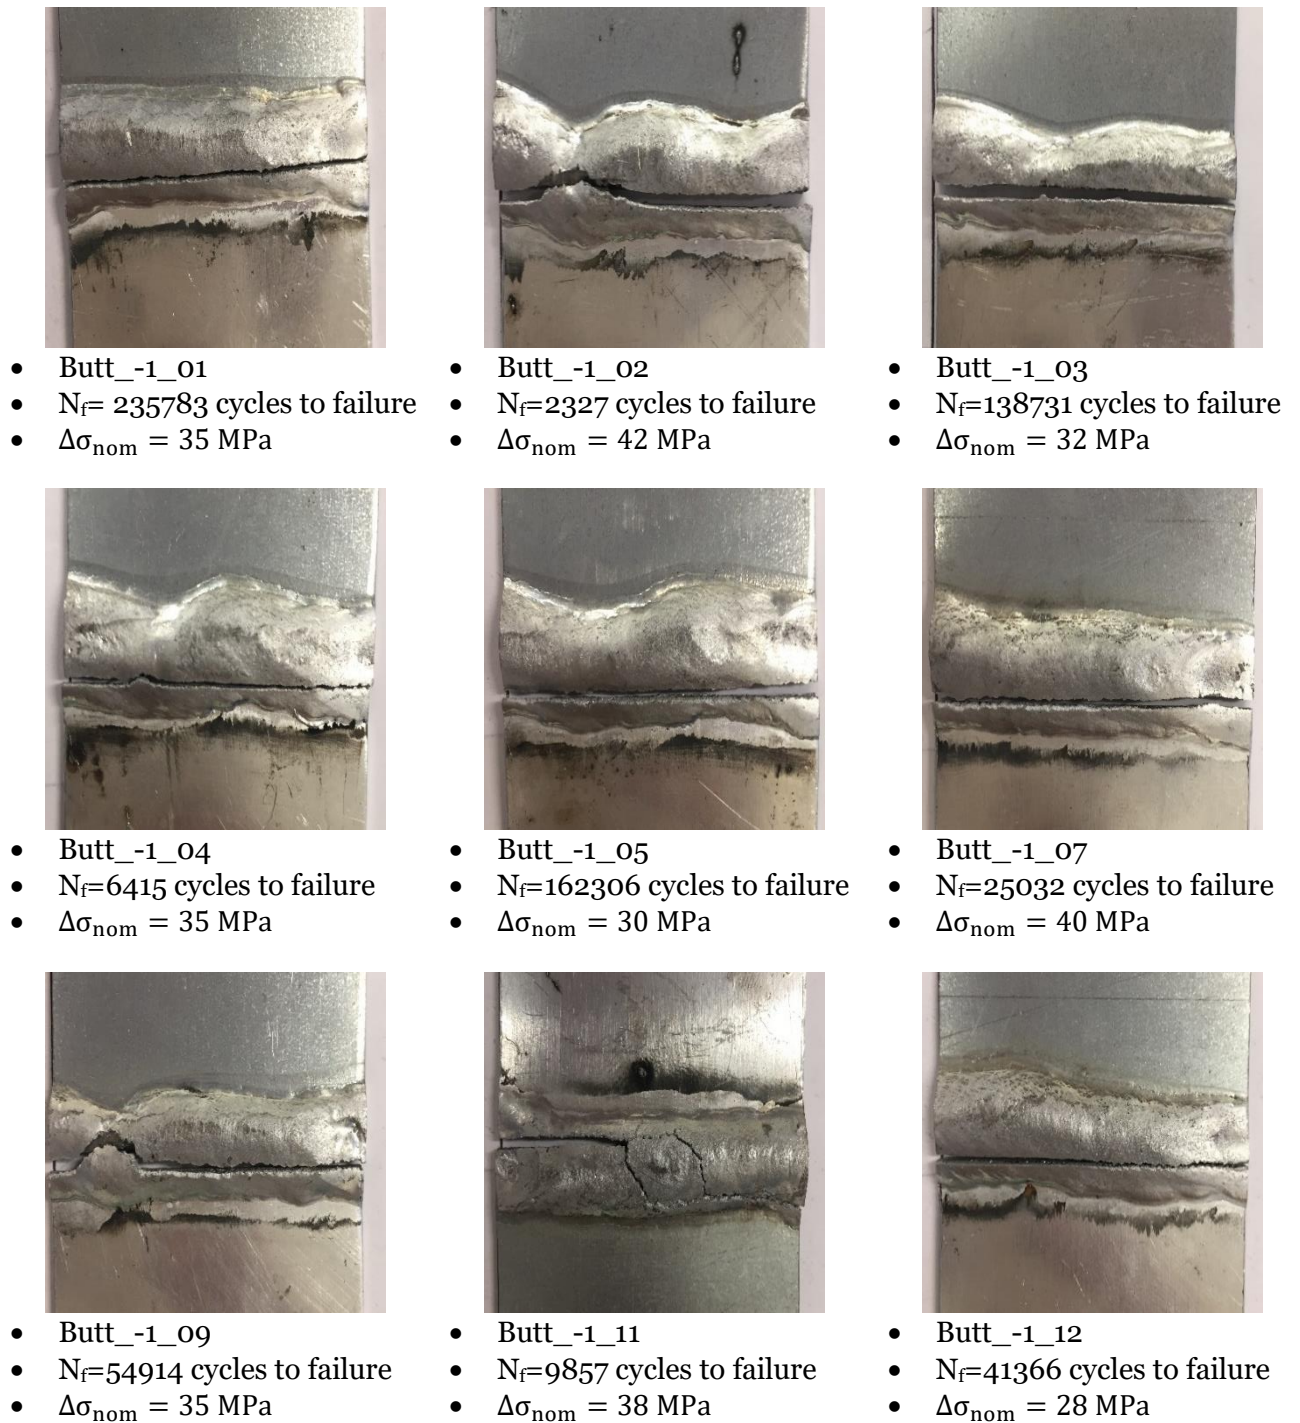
Fatigue failure of butt-welded joints with load ratio, $R=-1$.
